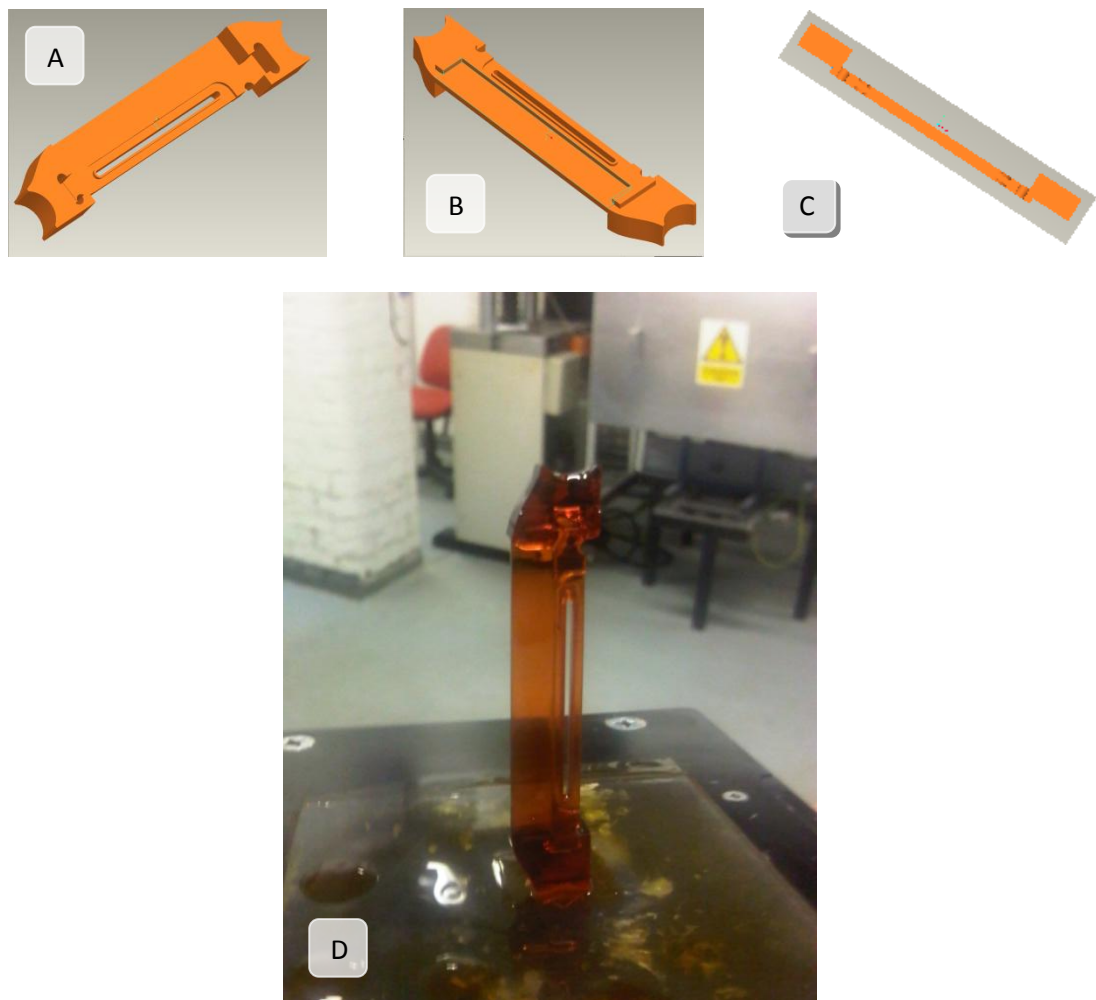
A, B & C) 'Gasket Holder' drawn in CAD ready for SLA manufacture. Top, Base, and Front elevations respectively. D) Manufacture of 'Gasket Holder' using SLA RP displaying the new component rising from the liquid precursor.
